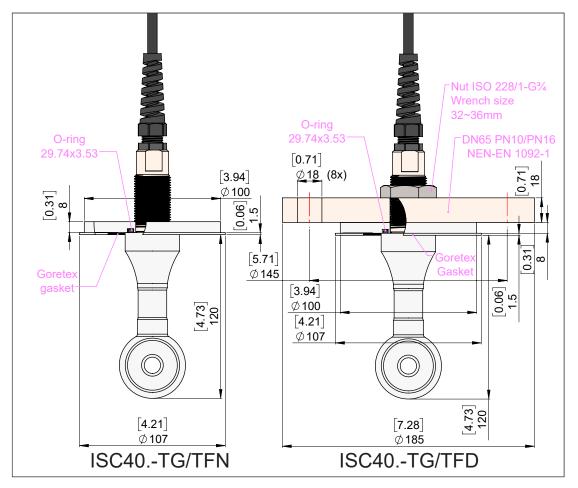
Flange adapters (opt. /TFD, /TFN) for -TG sensor in combination with T-piece
